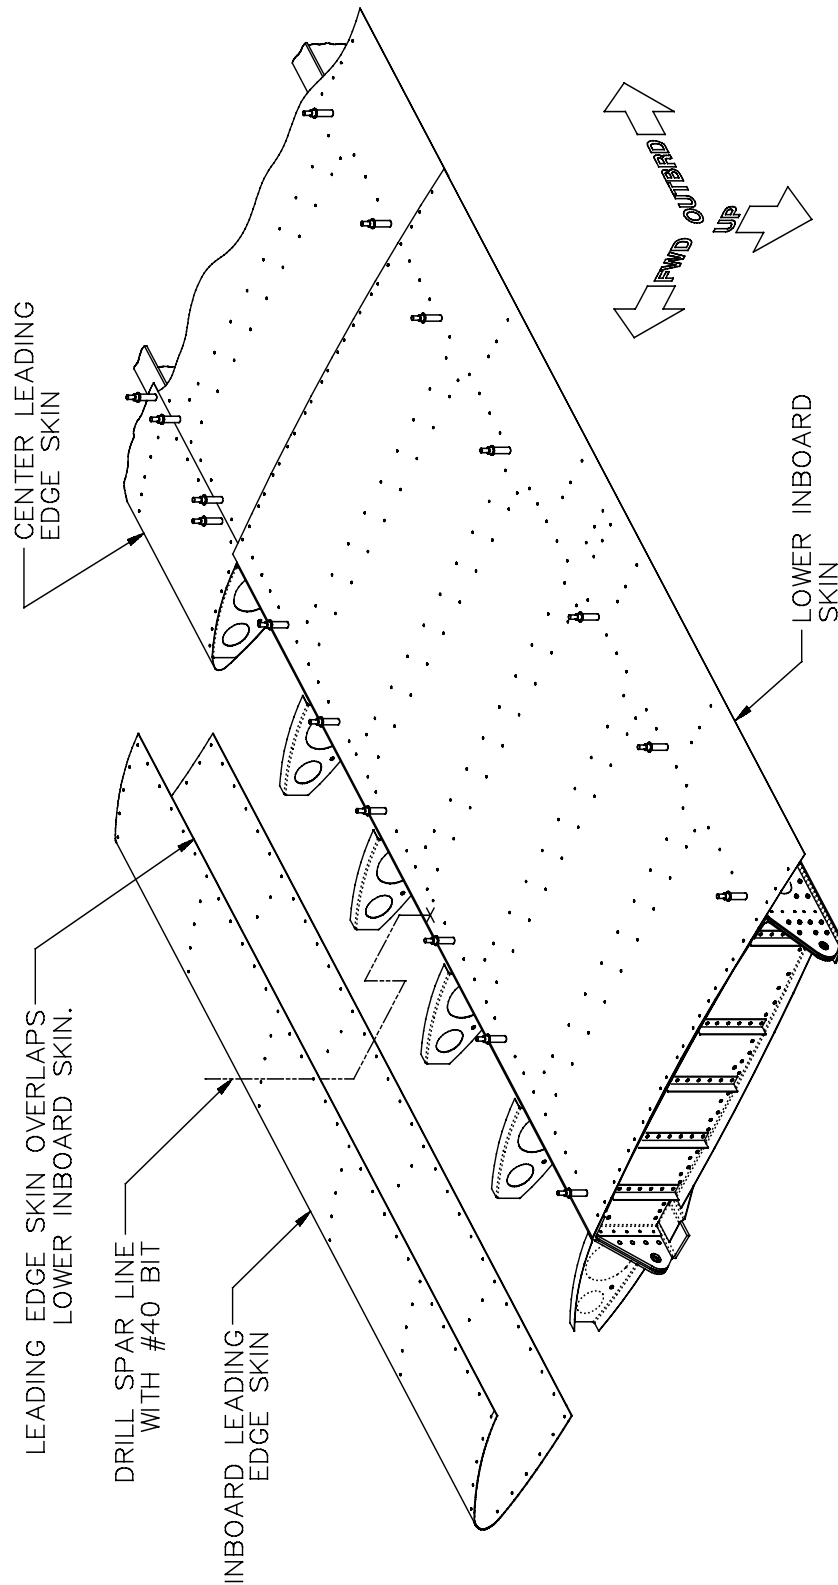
Fitting the Leading Edge Skin over the Lower Inboard Skin
